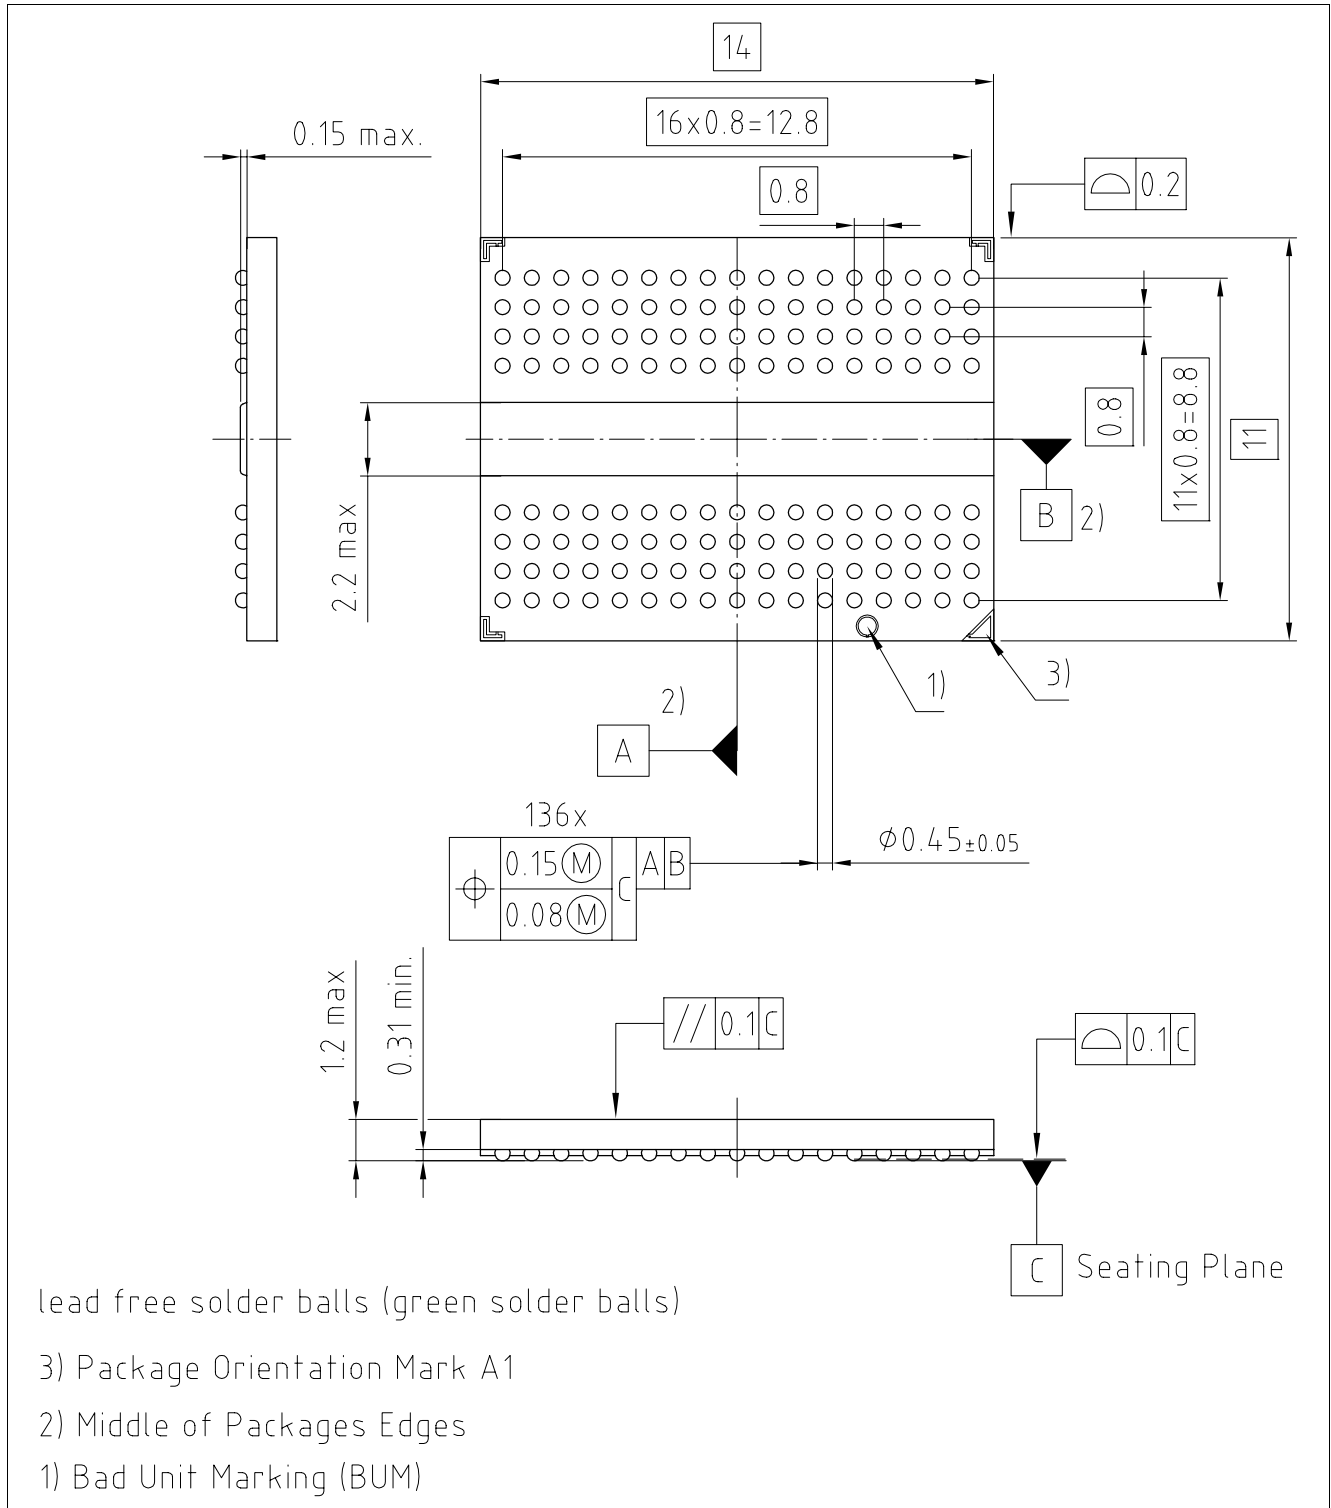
PG-TFBGA 136 package (11mm x 14mm)
